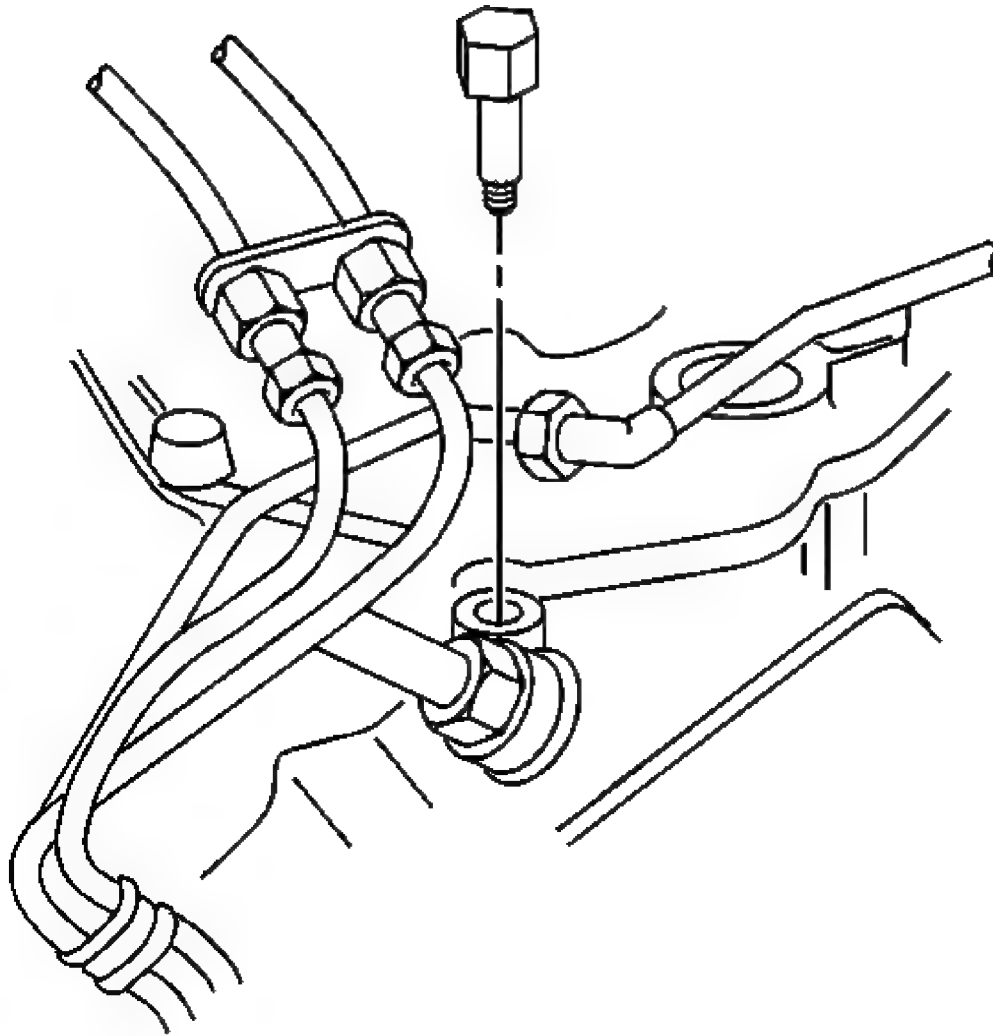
View Of Engine Oil Pressure Sensor Fitting
